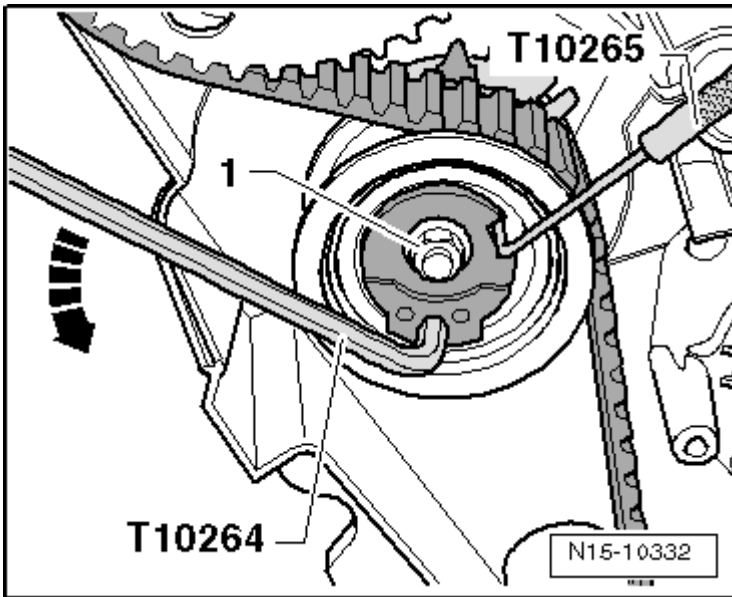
Identifying Long Reach T10264 And Locking Tool T10265
